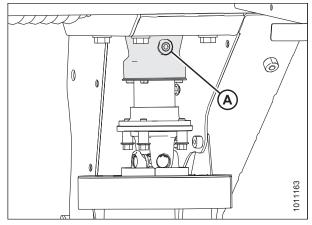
Cutterbar-Conditioner Drive Gearbox (T-Gearbox) Drain Plug
